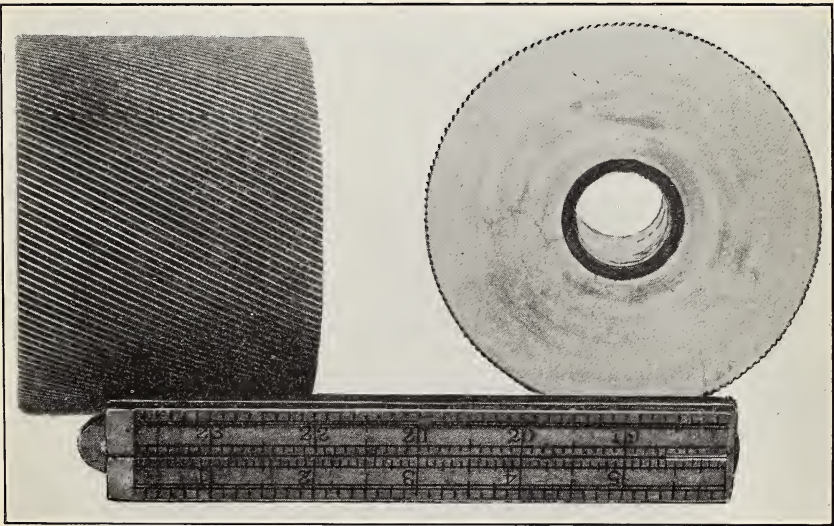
SPIRAL-CUT BURR, TWELVE TO THE INCH.
